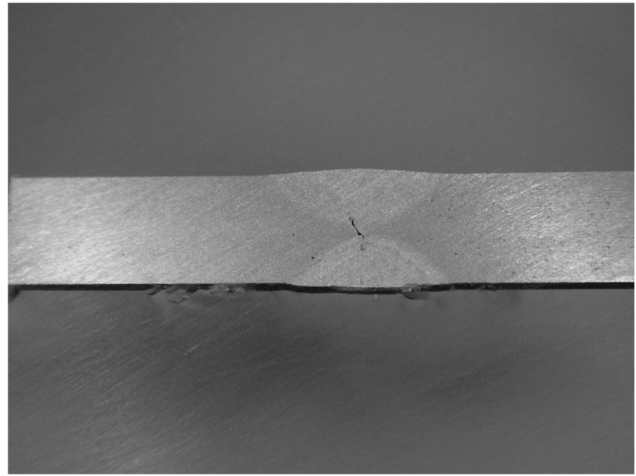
6061-T6511 aluminum plate welded with ER4043 rod. Ground to 600 grit finish then etched with AWS D1.2 Basic Etchant.
